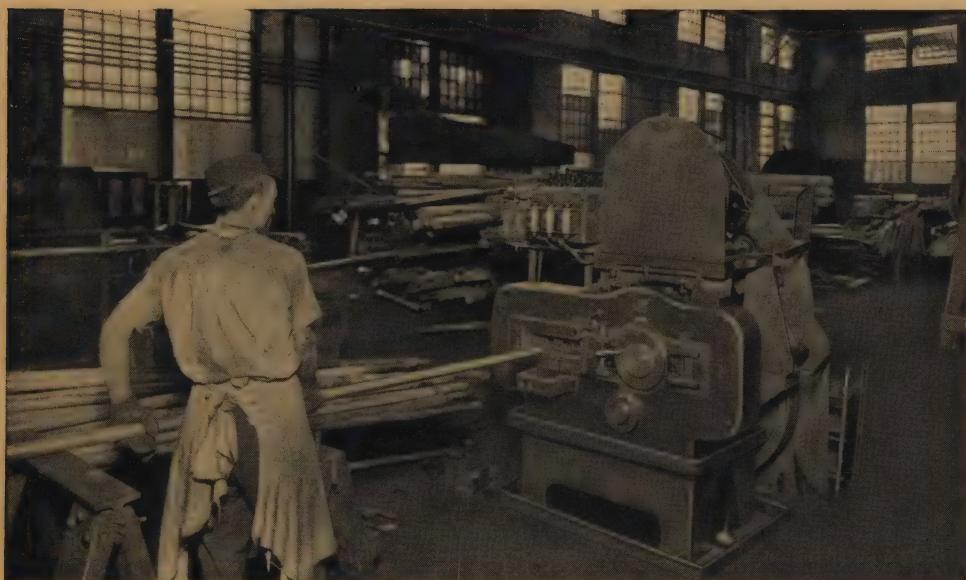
Pointing tubing preliminary to drawing. The openings into one of which the tube is about to be inserted are split and opened and closed continually under the action of the driving mechanism. The holes just below the pointing dies serve as gages into which the pointed tube must fit.
